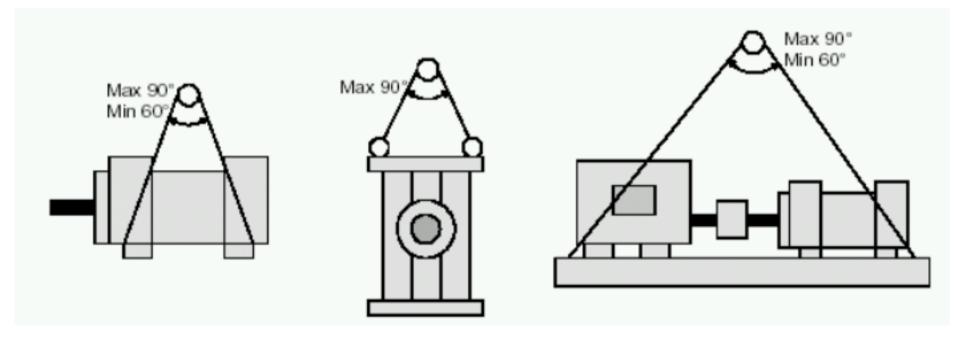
Lifting Pumps and Pump/Driver Assemblies
